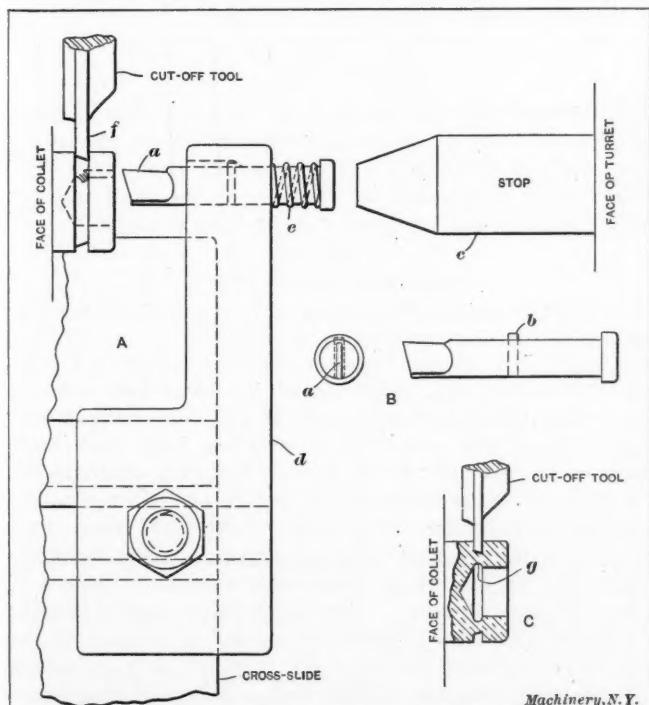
Tools and Method used in Cutting the Keyway in the Piece shown at A, Fig. 1
